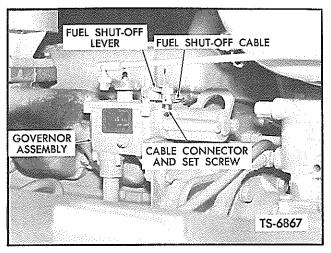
Adjust Engine Fuel Shut-off Control - G.M.
